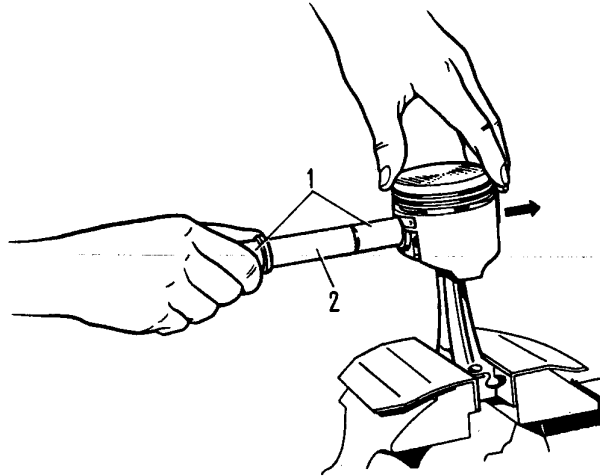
Press-Fitting Piston Pin into Connecting Rod Small End:
